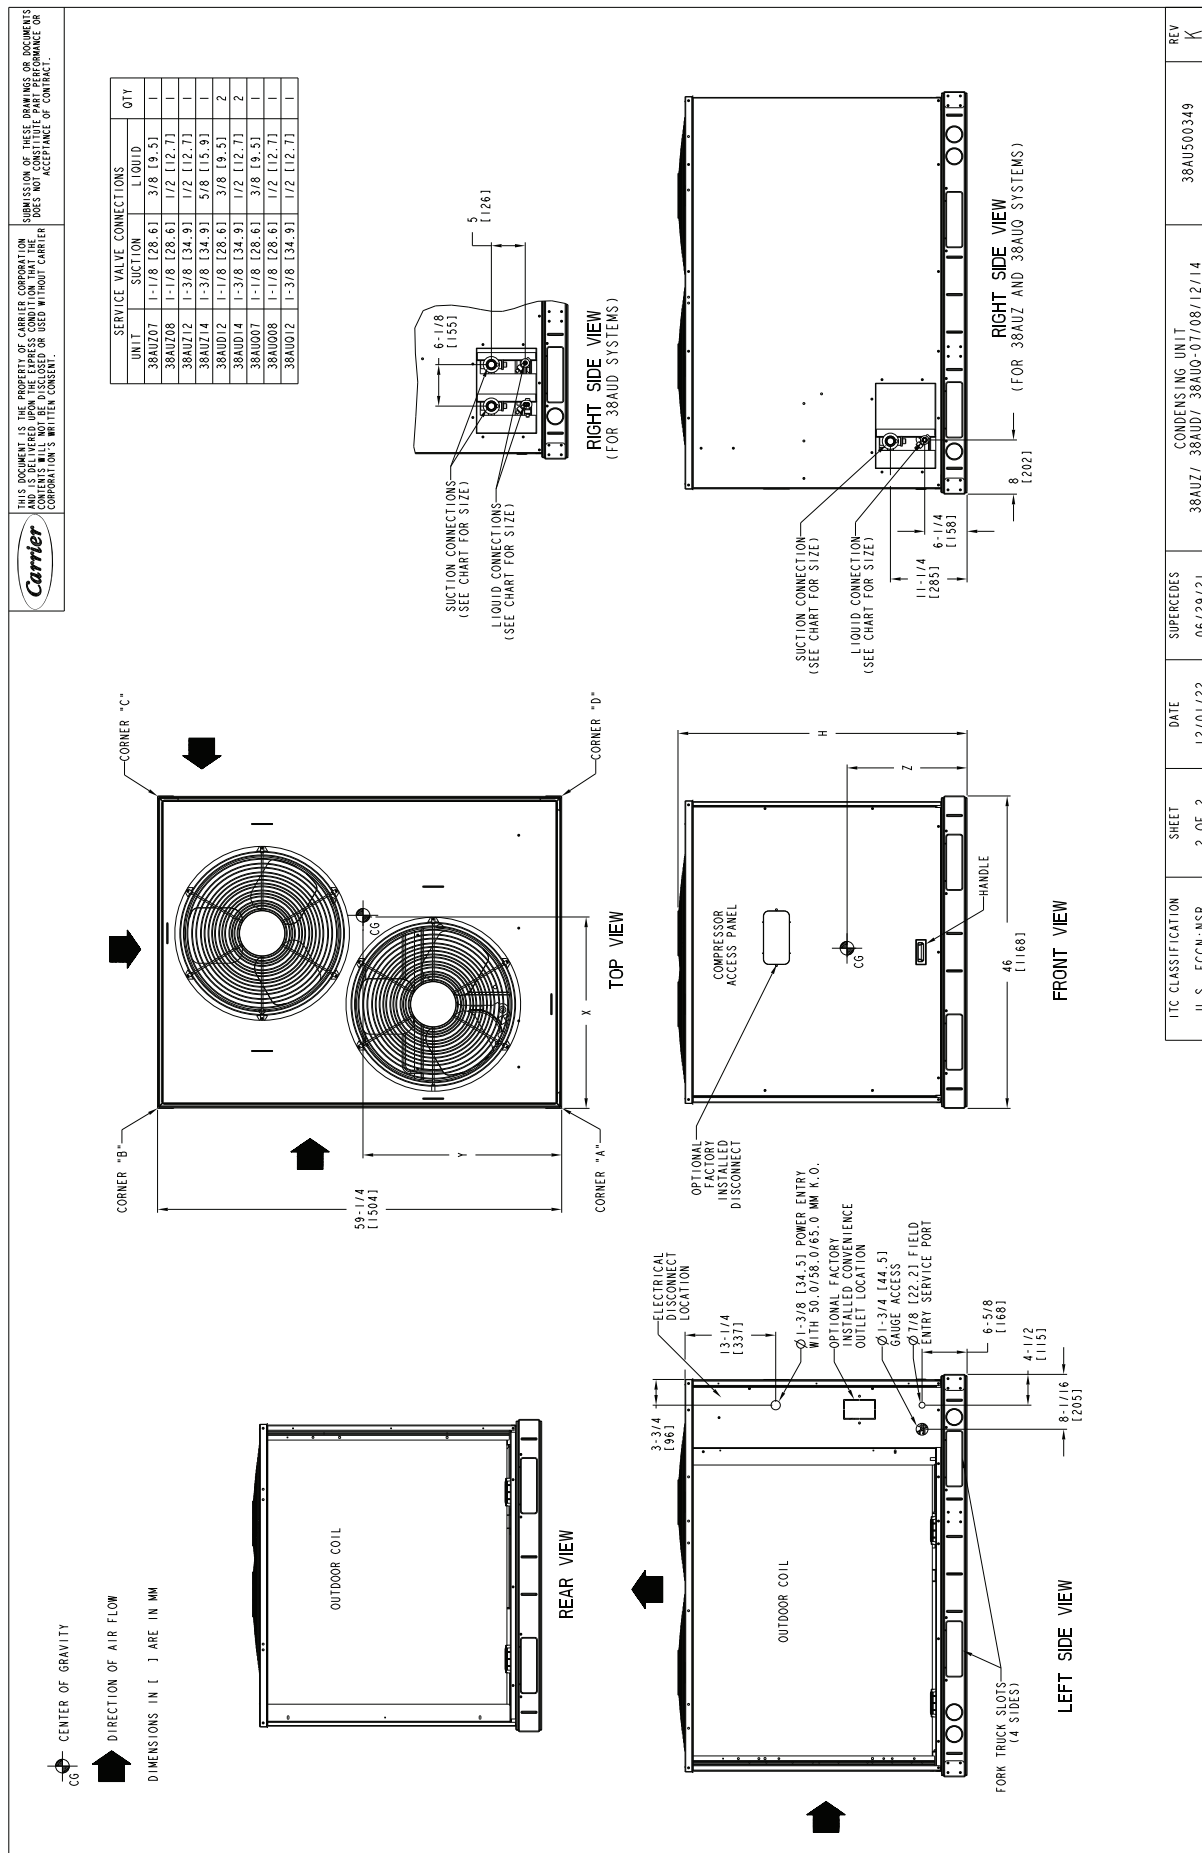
38AUD/Z 07-14 Base Unit Dimensions
